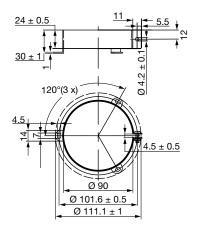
Dimensional outline of clamp for case Ø D = 90 mm
